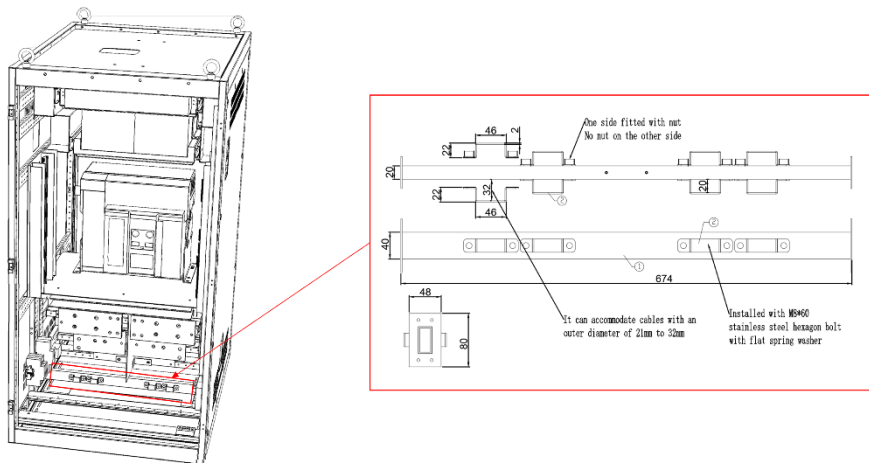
Cable wiring reinforcement fixing schematic (21mm≤Cable Diameter≤32mm)
